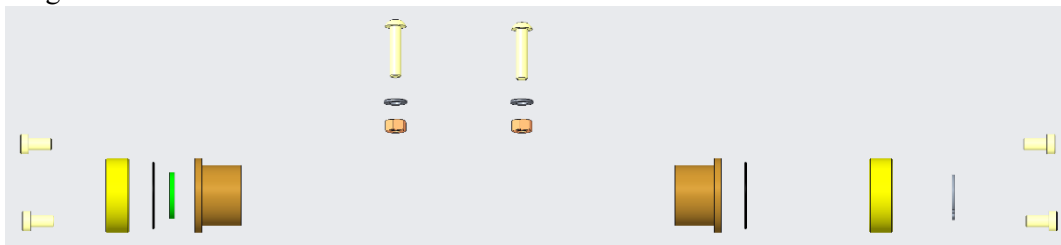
Exploded view of all standard parts within the assembly with designed components hidden
